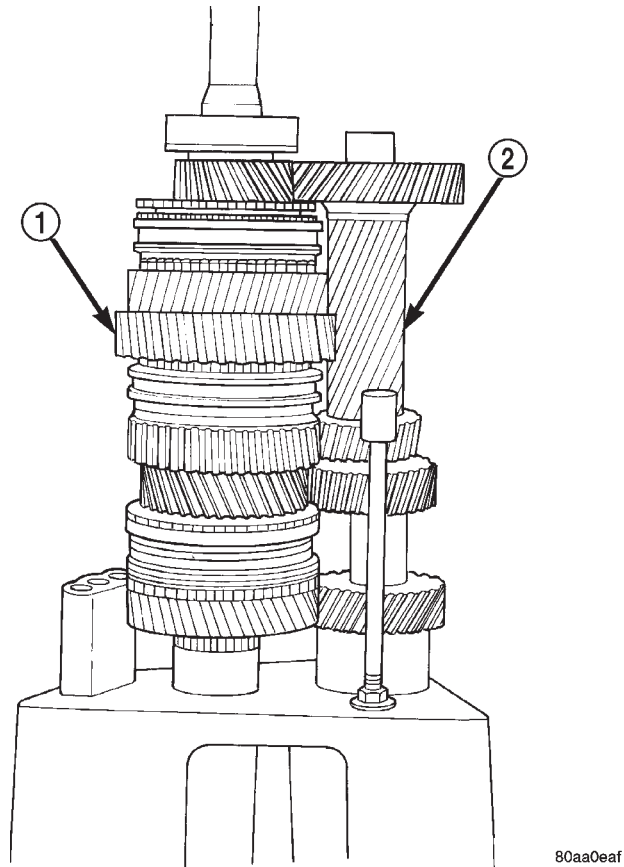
OUTPUT SHAFT AND GEARTRAIN
